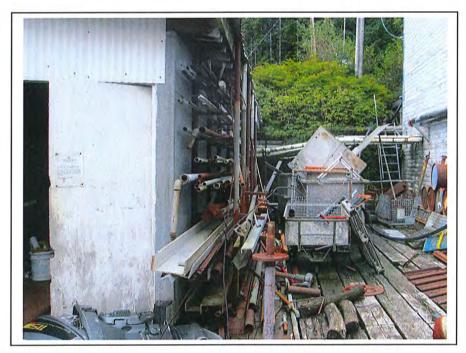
Steel bars stored east of the Fabrication Shop, looking north. (September 13, 2014)
